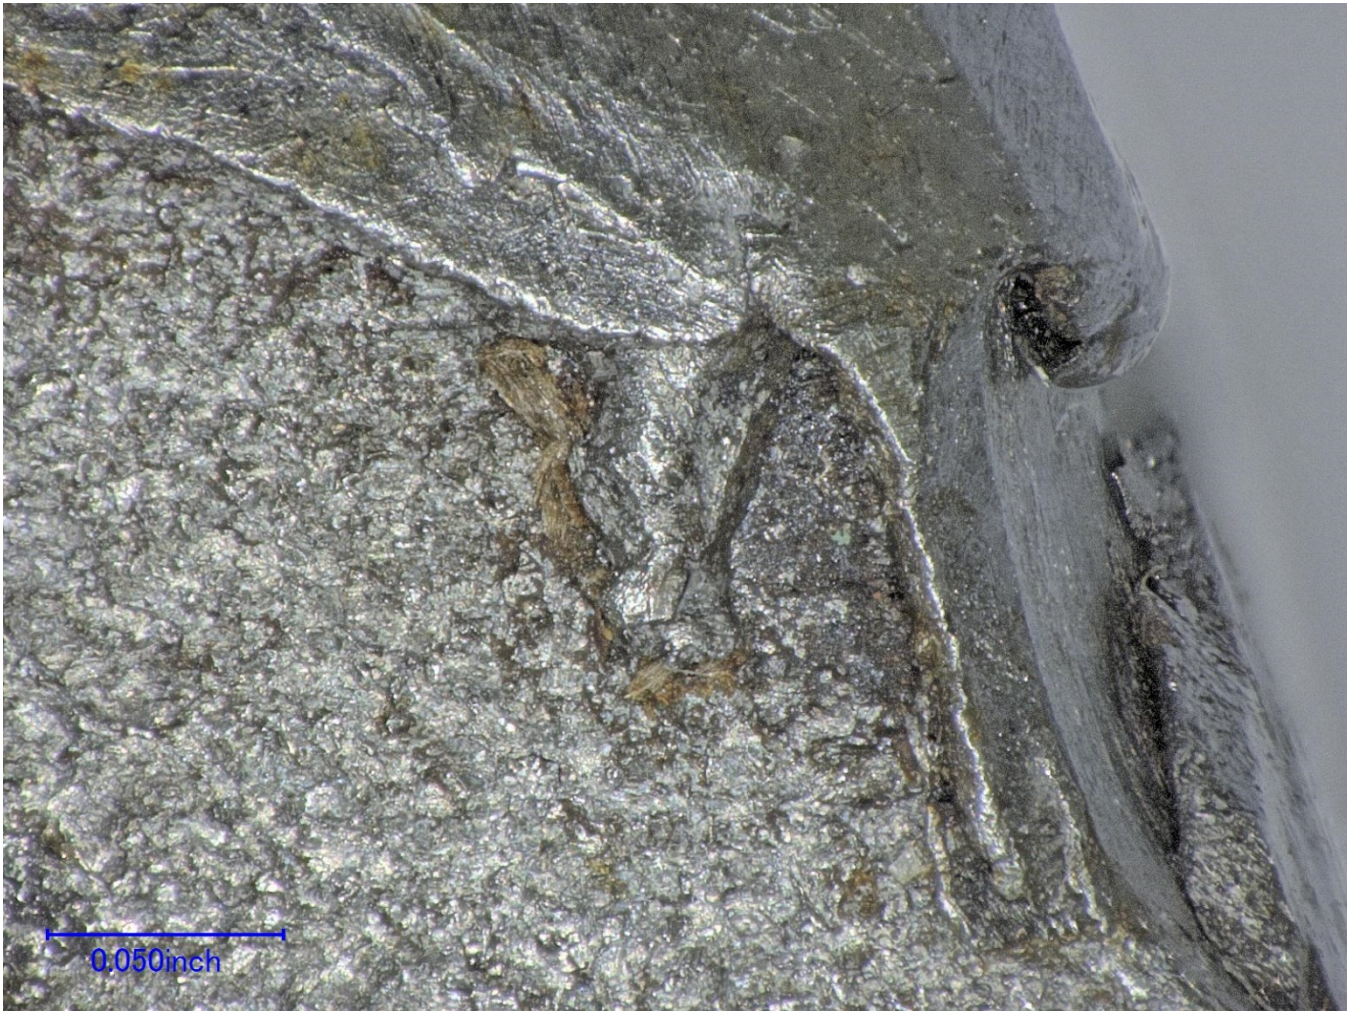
Closer view of the gage corner in the 12N head fracture surface (shown in Figure 45).
